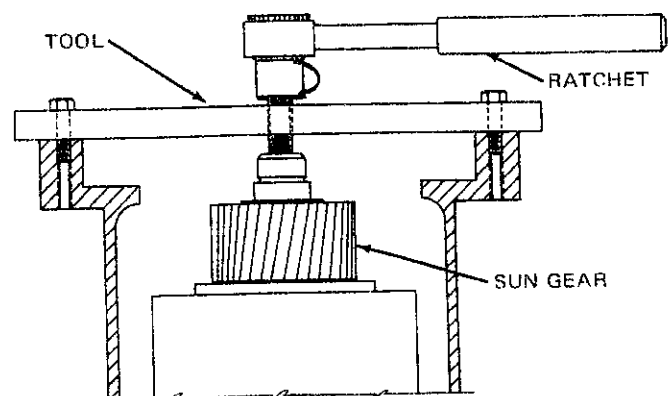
PRESS AGAINST SUN GEAR SHAFT.
